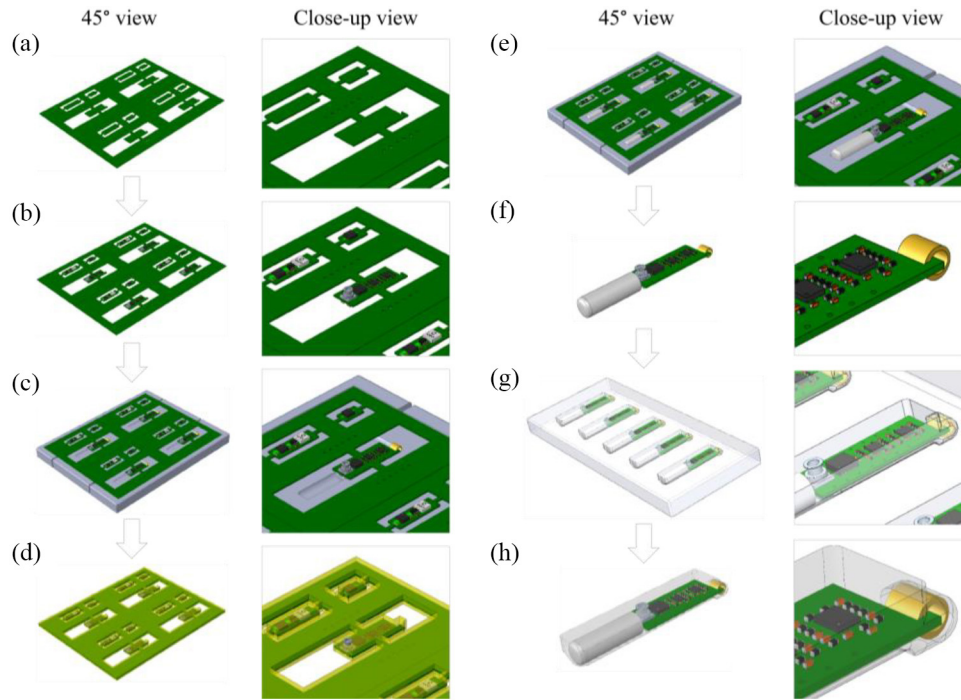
Manufacturing process for the Lab-on-a-Fish with a 45° perspective and close-up view. (a) Manufacturing the thin multilayer PCB (four tags each). (b) Assembling the chips. (c) Attaching the PZT transducer. (d) Depositing a thin-film parylene-C layer. (e) Attaching the microbattery. (f) Cutting the main board off the panel. (g) Encapsulating the tag assembly using epoxy. (h) Attaching the ECG and EMG probes and applying the final parylene-C layer.
